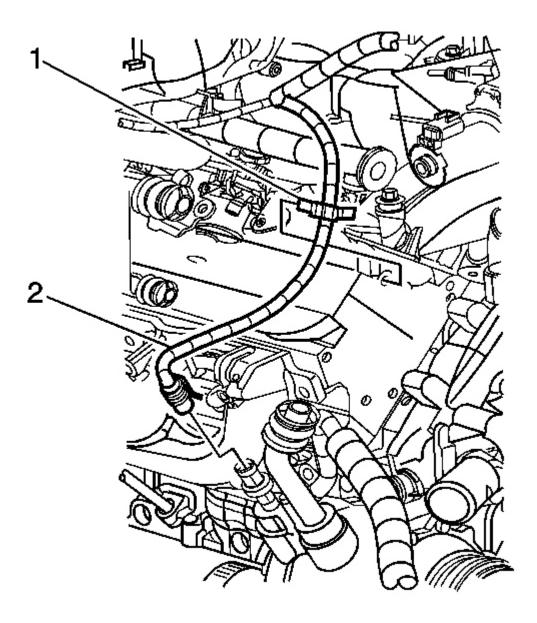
View Of A/C Compressor Pressure Switch Electrical Connector & Retaining Clip
